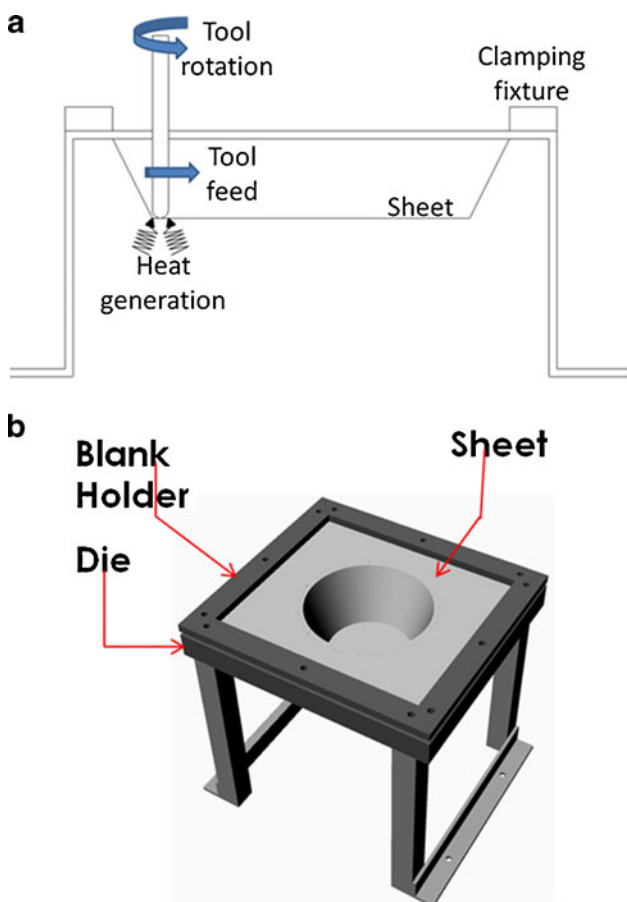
a Sketch of the proposed process and b of the utilized clamping fixture
